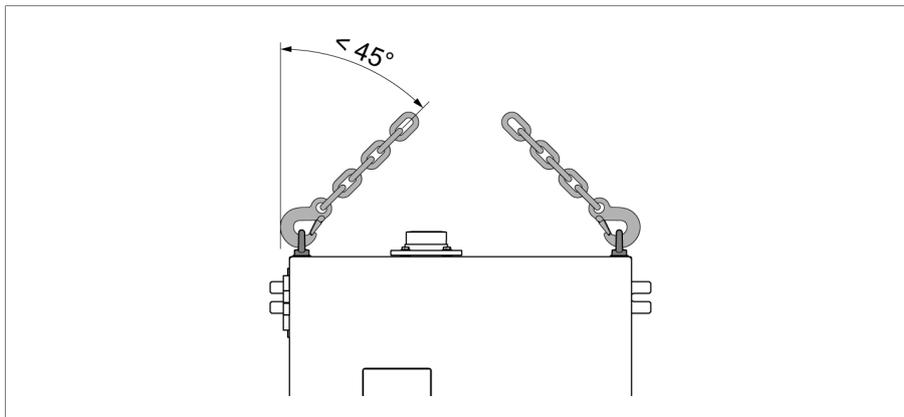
Maximum permissible cable angle for the lifting gear limit stop of the control cabinet
